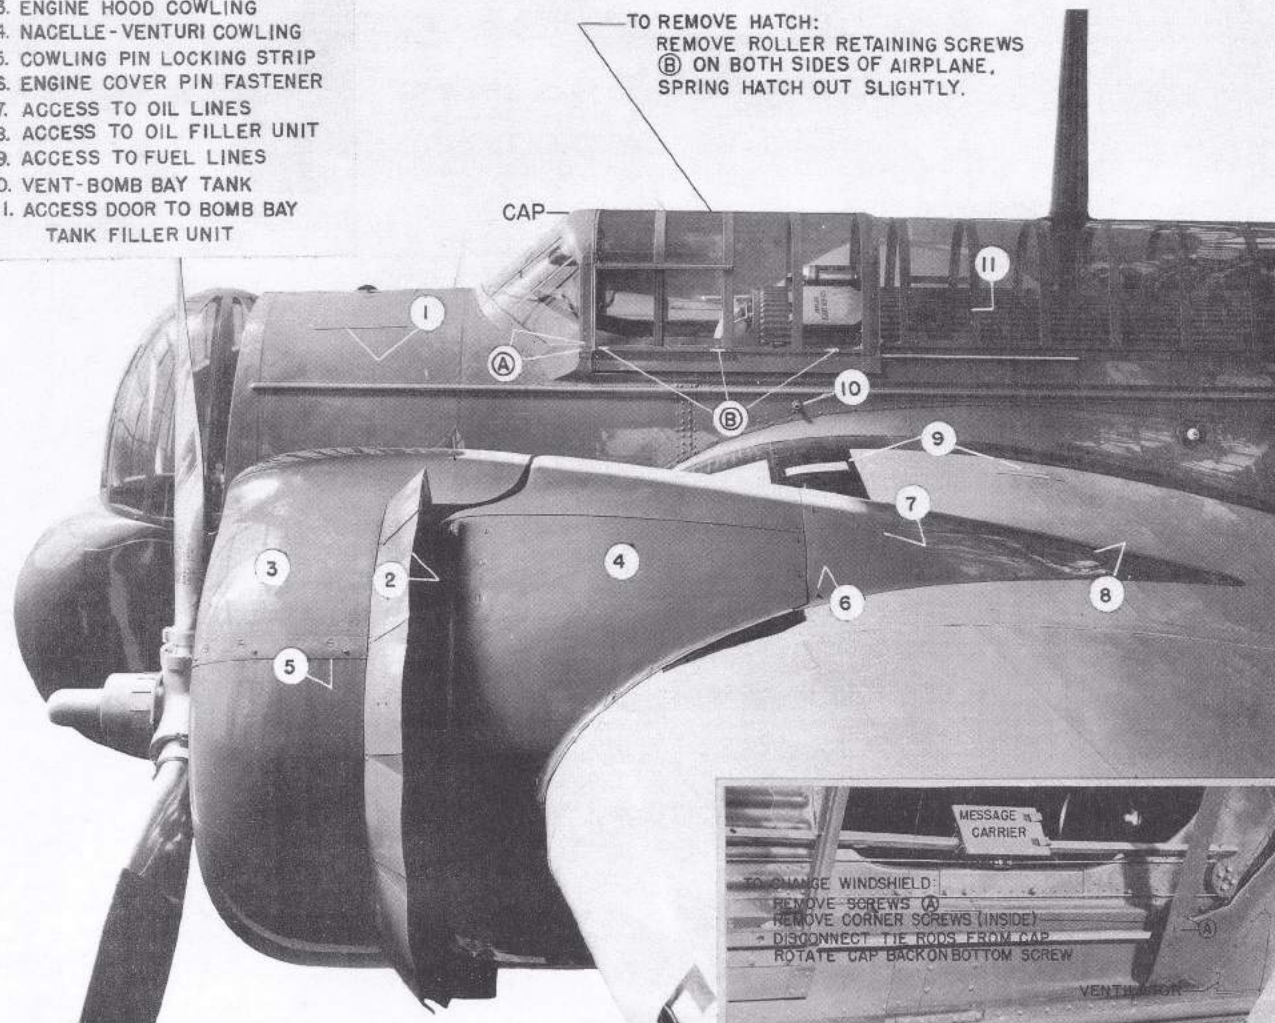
B ENGINE AND NACELLE COWLING INSTALLATION - COMPLETE
